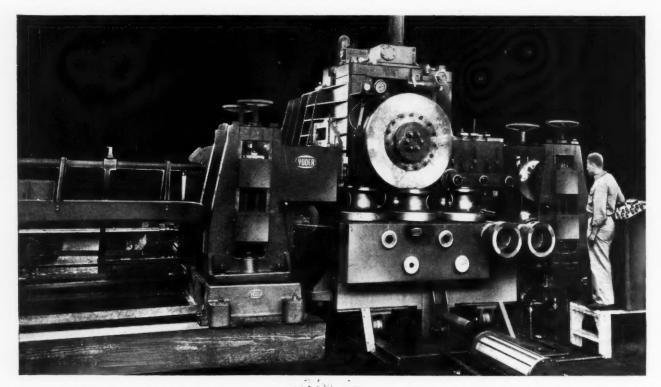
Yoder Giant-size Electric Resistance Welding Με chine of the Rotating Type Used in Welding Large Pipe
